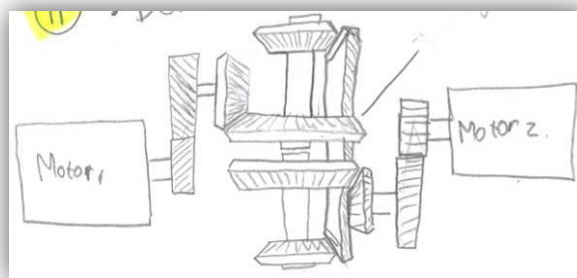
Bevel & Spur/Helical gear rotational joint concept
